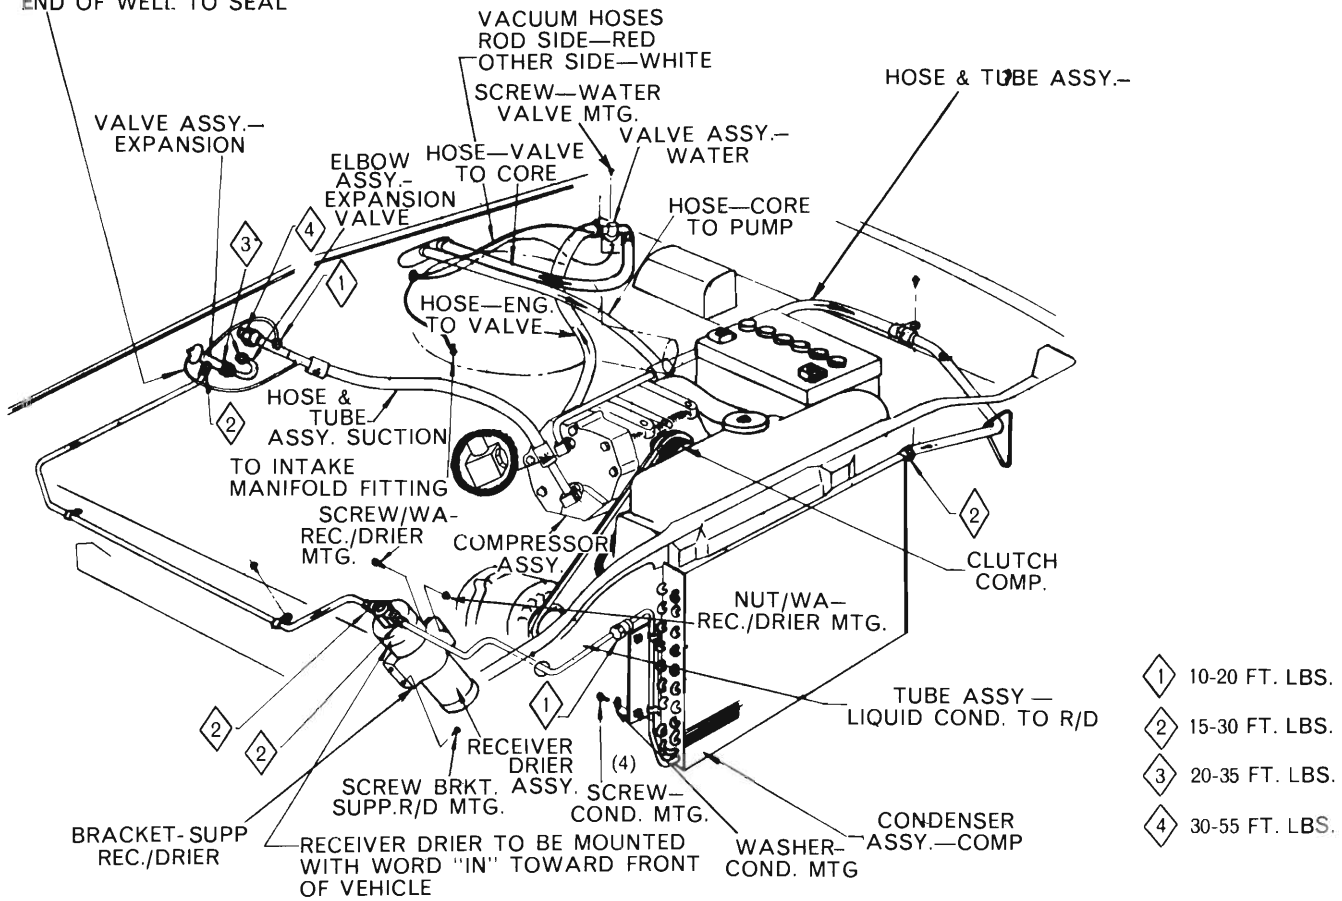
Air conditioning and heater plumbing - 8 cyl. engine
